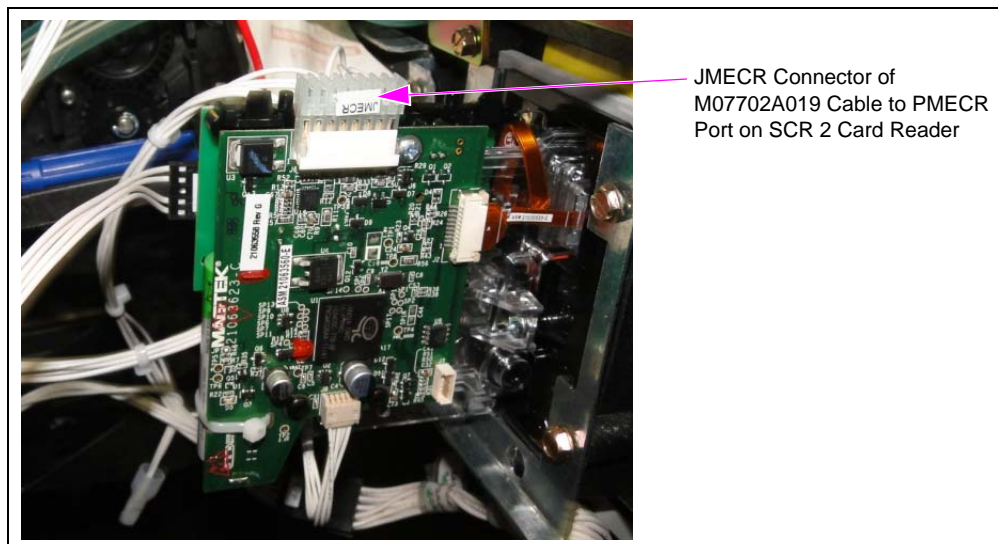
Connecting Cable to GCM and SCR 2 Card Reader
